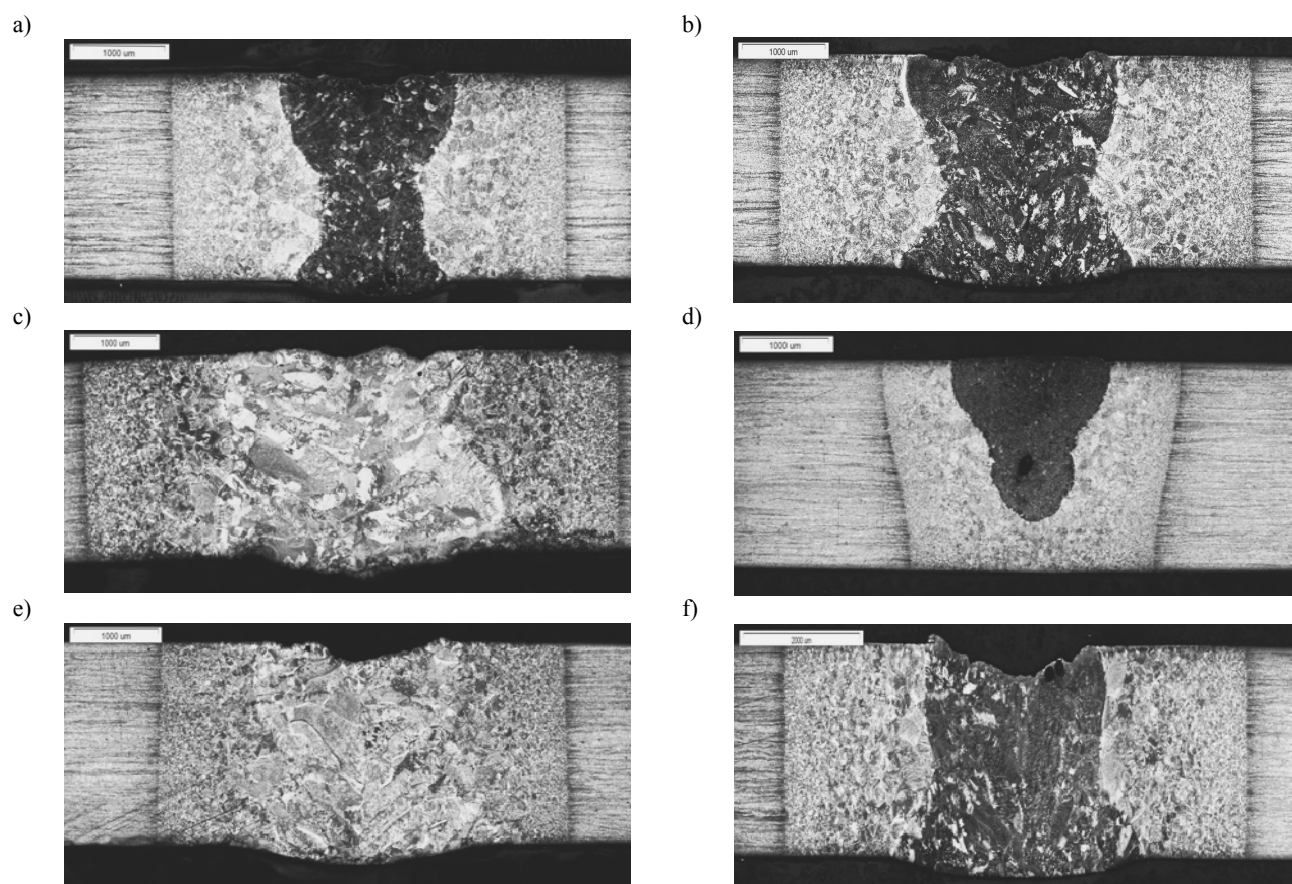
Macrograph of the cross section of bead-on-plate welds of titanium alloy Ti6Al4V sheets 2.0 mm thick laser welded with the TRUMPF TruDISK 3302, Table 6; a) weld no. 1, b) weld no. 2, c) weld no. 3, d) weld no. 4, e) weld no. 6, f) weld no. 7
